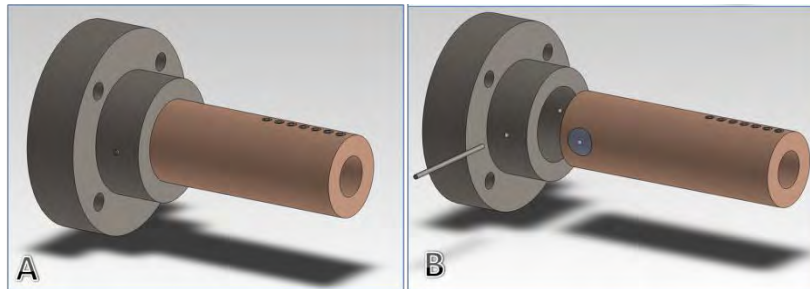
A) Assembled view of adapter. B) Exploded view of adapter.
